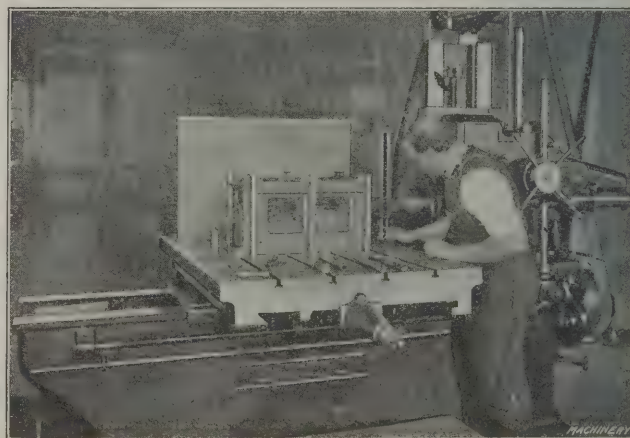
Locating the Spindle in Position vertically for Boring a Hole in a Jig
